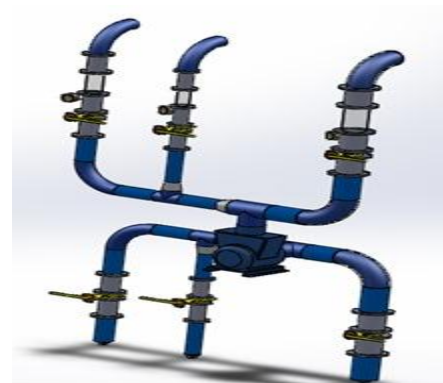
Final Assembly of Common HeaderLine 3" to 6"
